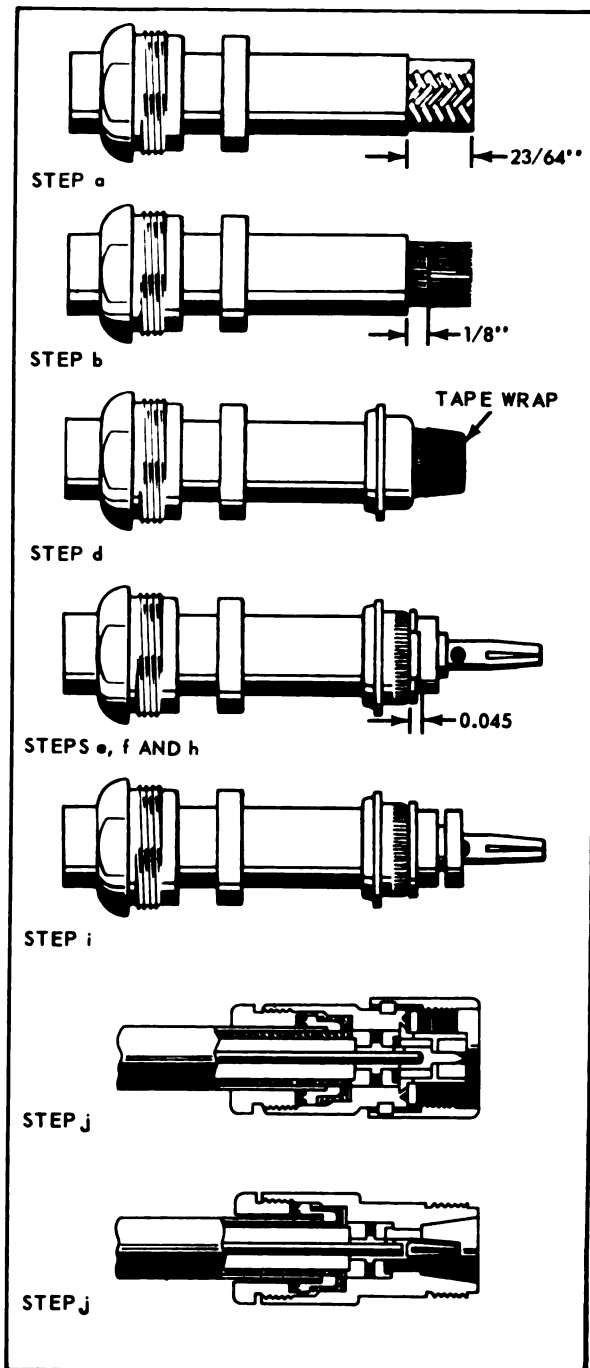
Attaching N Connectors with Captivated Contacts to Coaxial Cable
